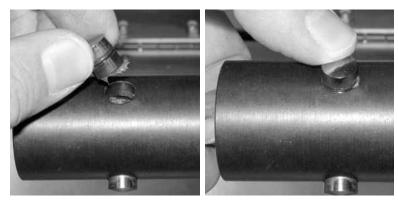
Put the clamp leg in the mandrel, then press it in securely.
